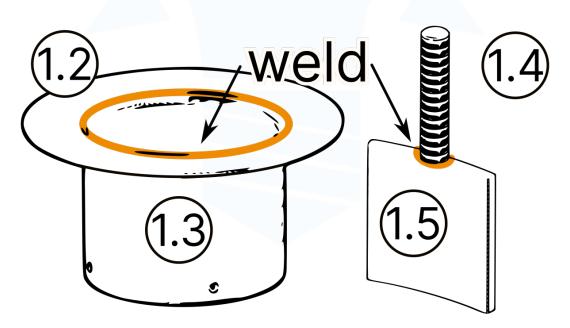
Welding job for the outflow pipe and four vanes
